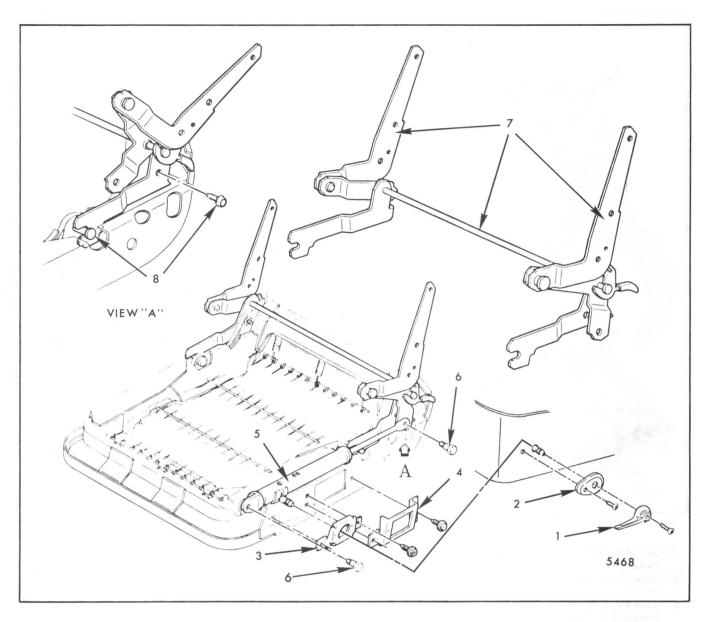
Salon Bucket Seat Reclining Actuator and Hinge - Oldsmobile "A" Styles
